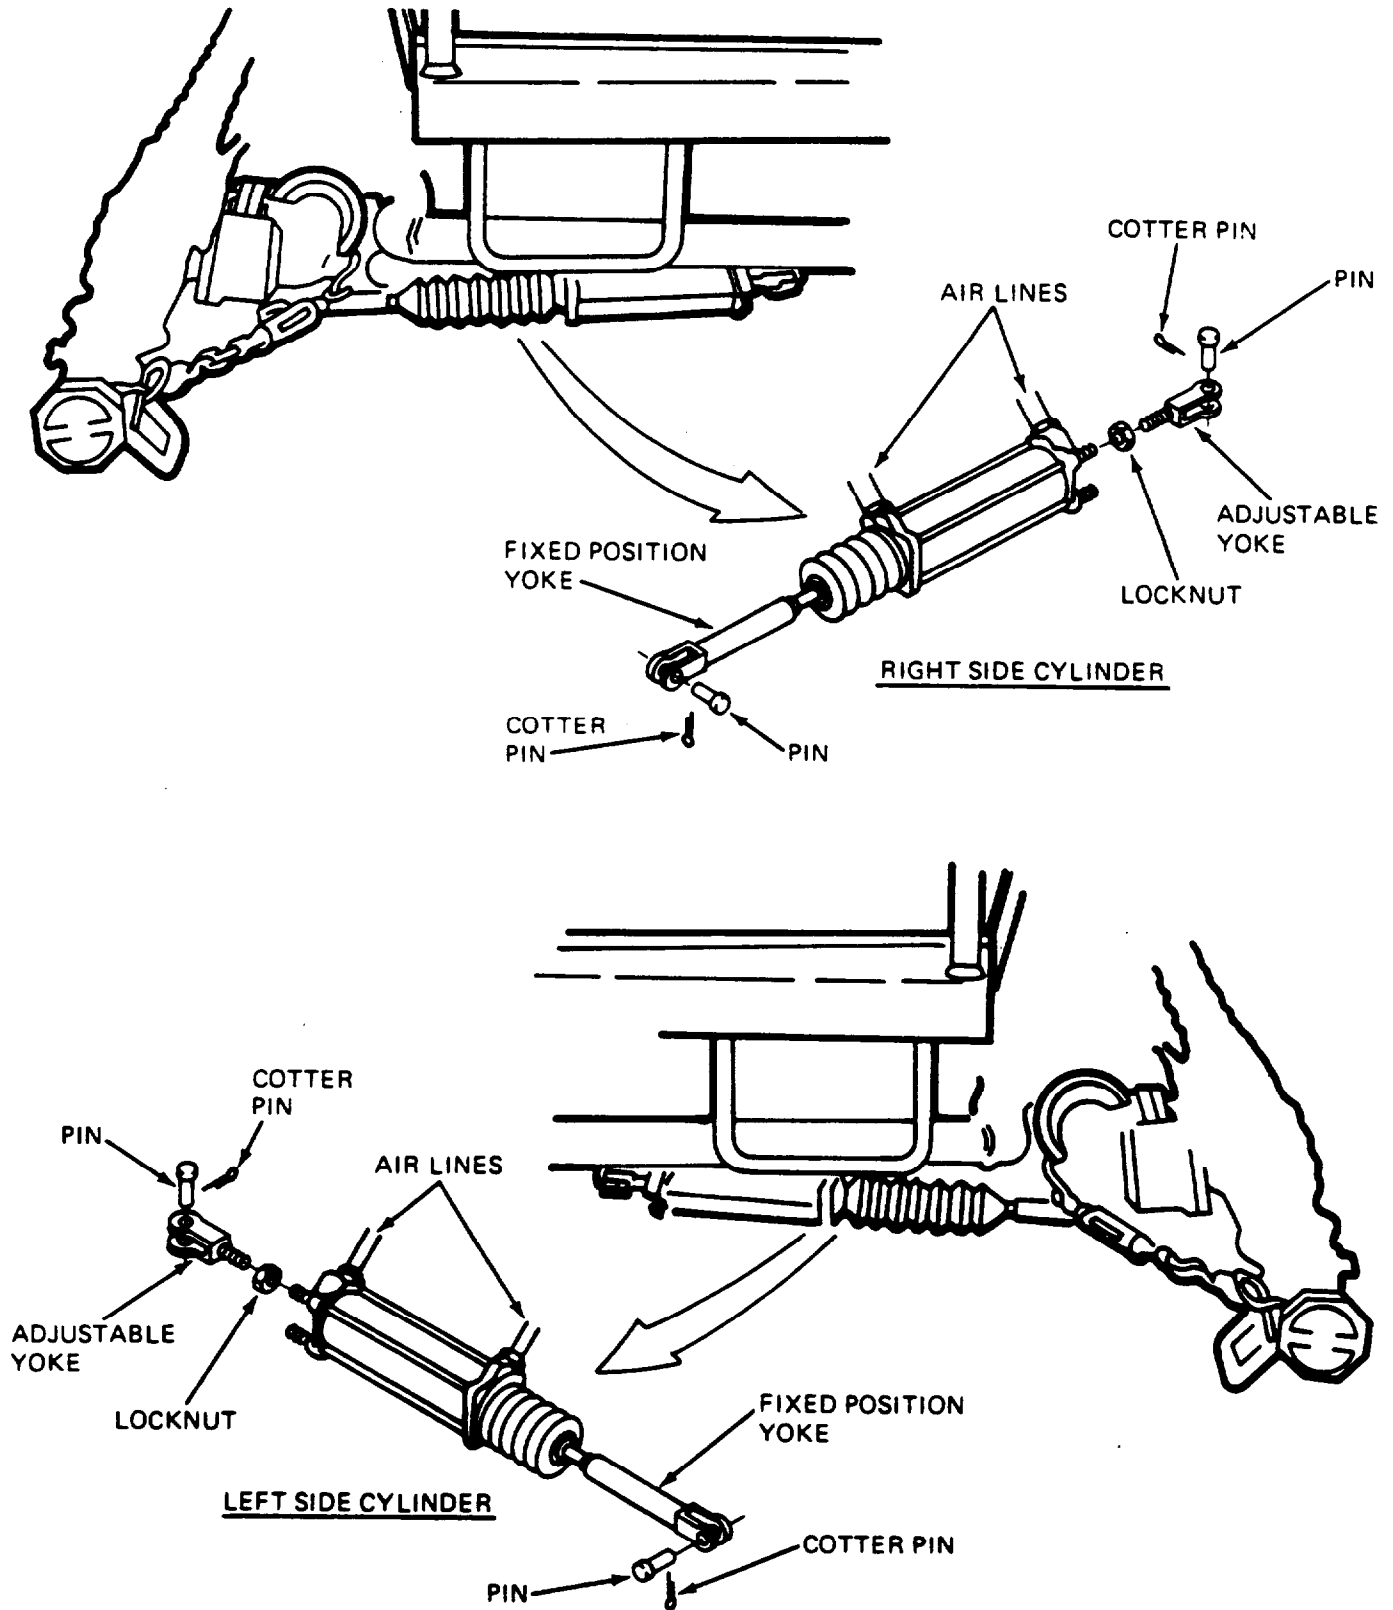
Removal of Bar Turn-Up Cylinders.
